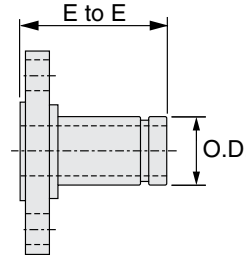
SS STAINLESS STEEL FLANGE ADAPTER
